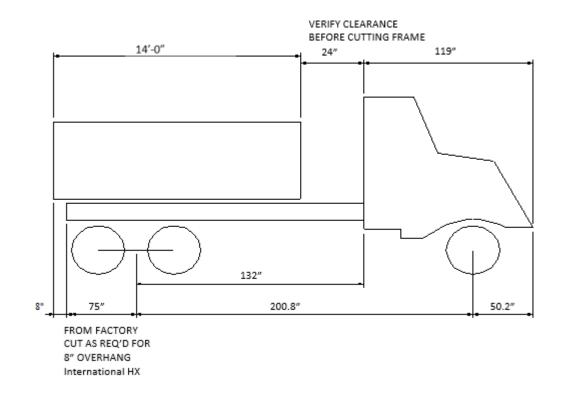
Typical Tandem Axle Truck Dimensions with Set Back Front Axle
